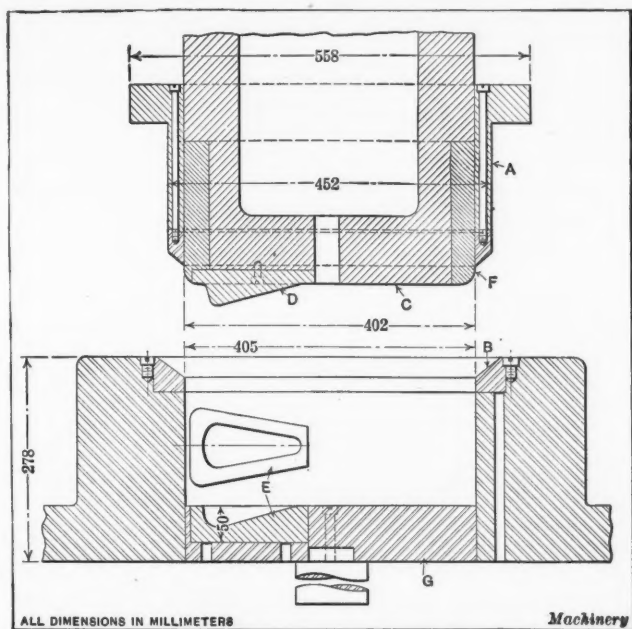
Punch and Die employed in the Third Operation in the Manufacture of Seamless Kettles
